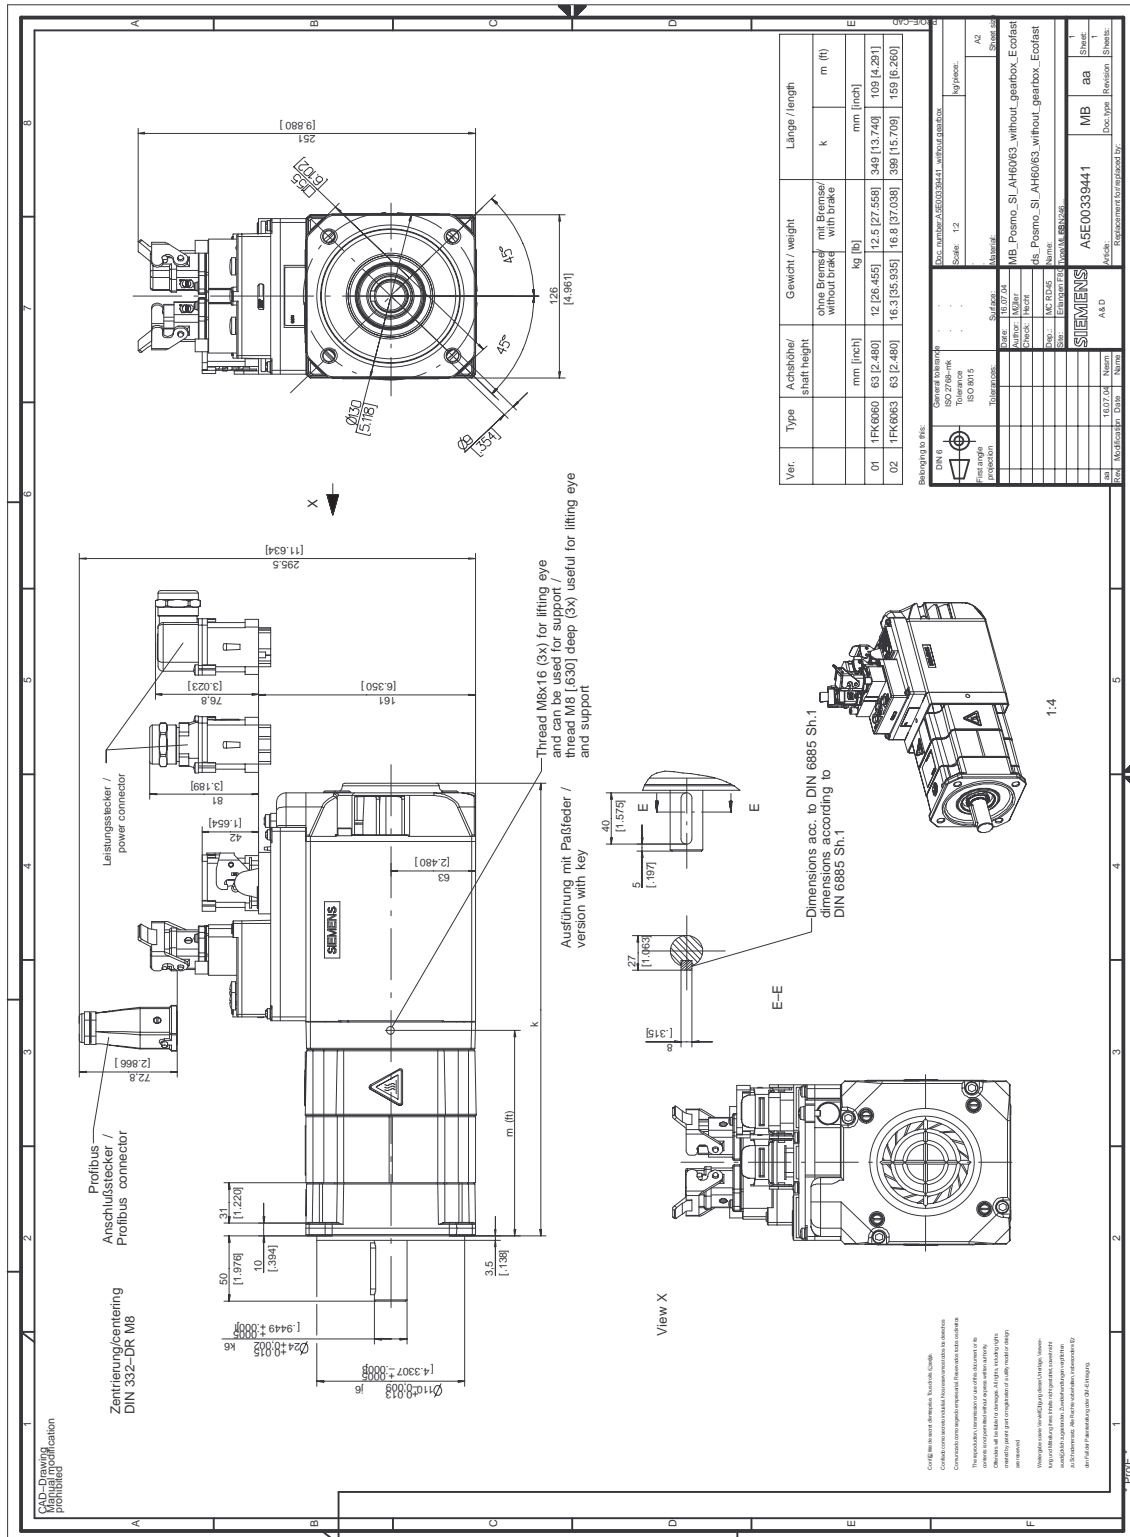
Dimension drawing POSMO SI ECOFAST 6SN246□-2CF□□-1G□□
